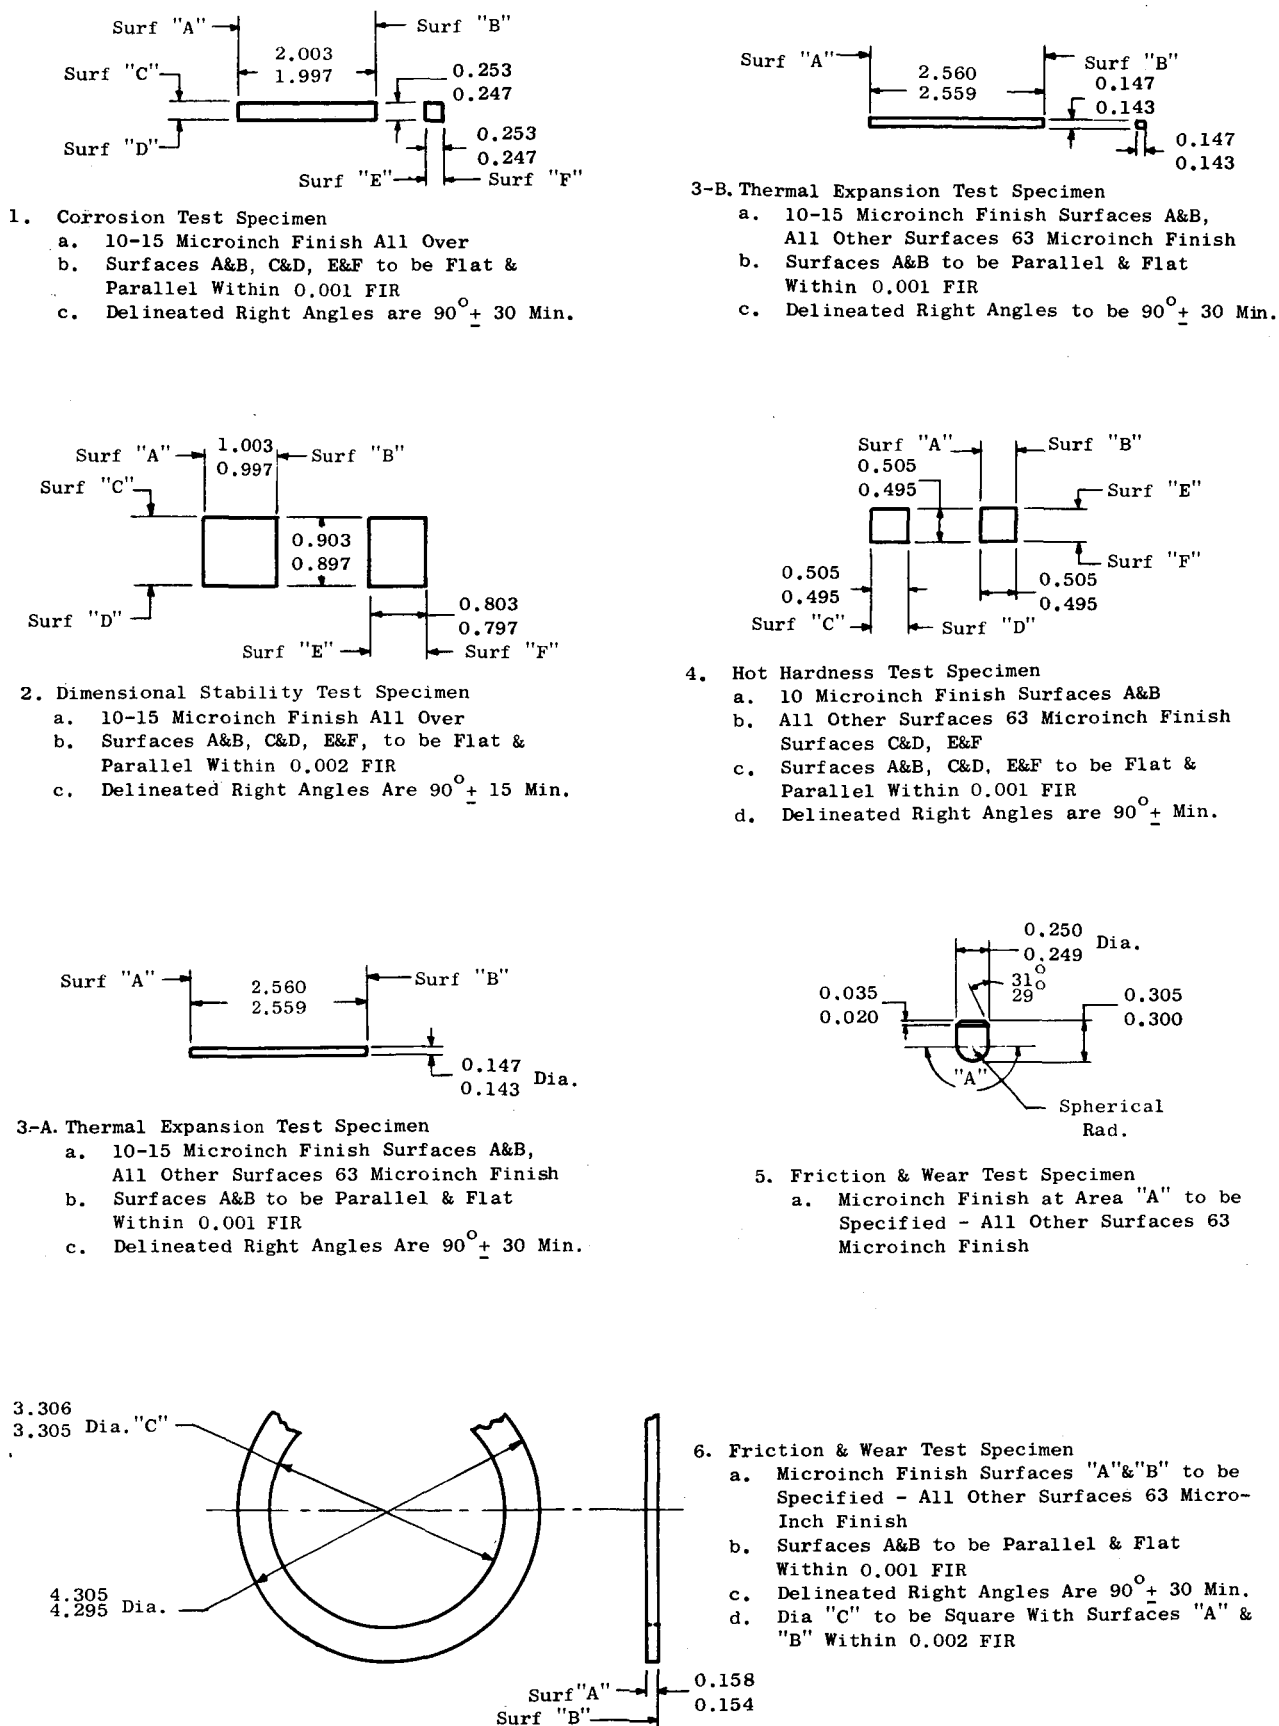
Dimensions of Test Specimens to be Used for Corrosion, Dimensional Stability, Hot Hardness, Thermal Expansion, and Friction and Wear Test Programs.
